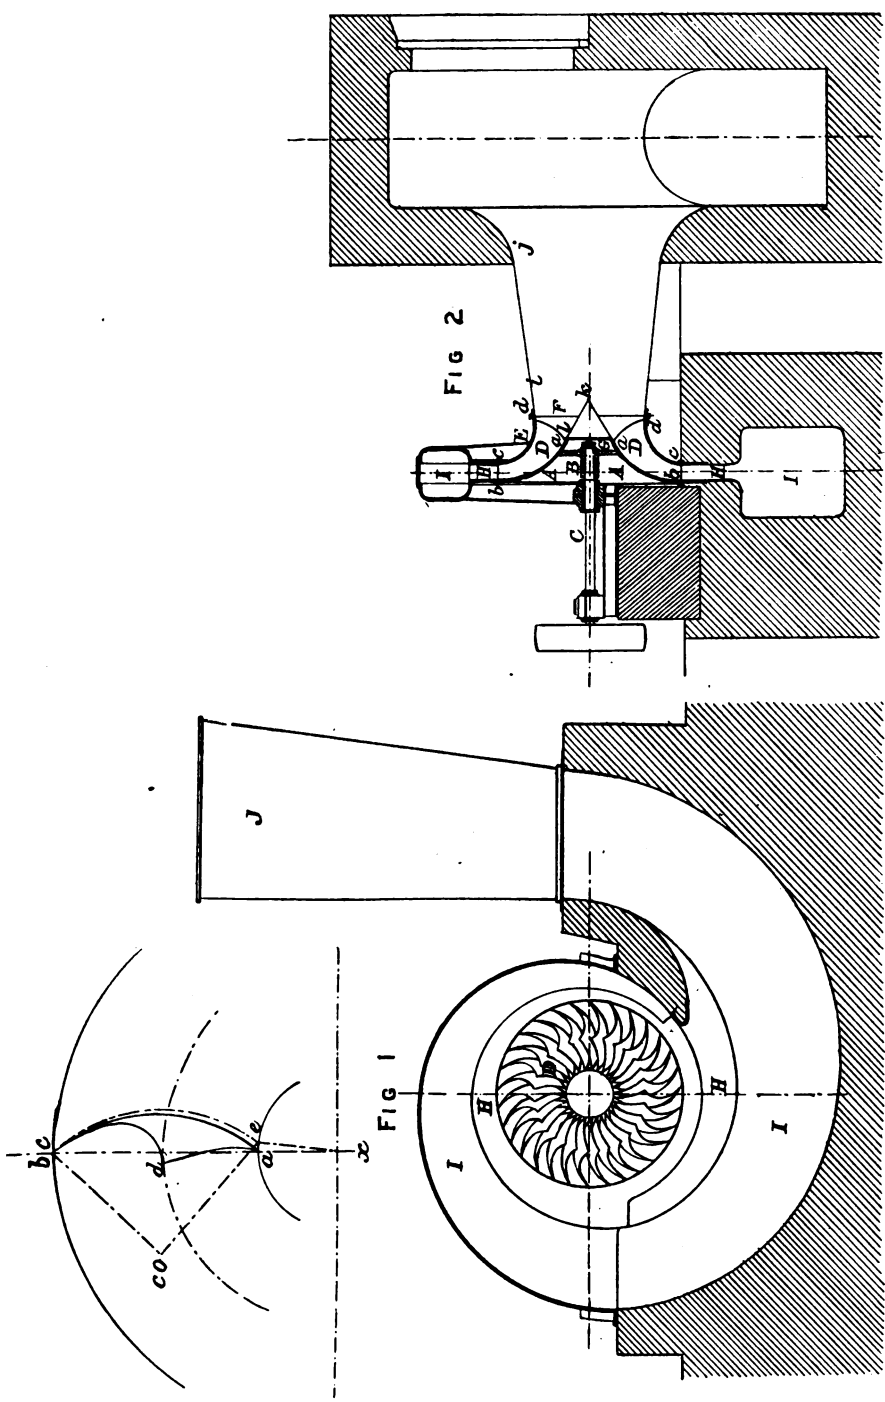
The Rateau Ventilator. (1) Transverse Section ; (2) Longitudinal Section ; (3) Construction of Blades. (From *Trans. Inst. M.E.*, vol. iii. p. 414.)
